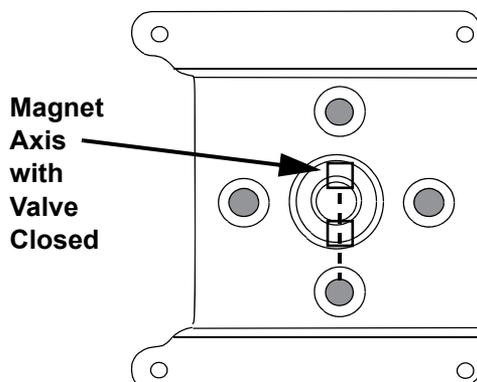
Magnet Orientation for Rotary Valves with Valve Closed
